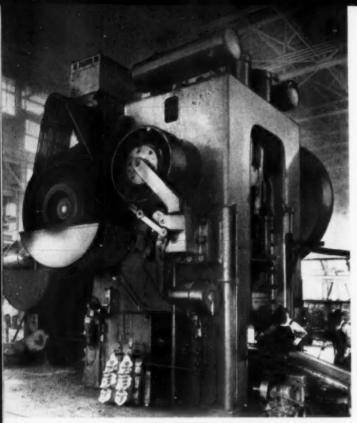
This 6000-Ton Mechanical Forging Press, Driven by a 400-Hp. Motor, Is Claimed to Be the Largest Ever Built for This Type of Work. Forged shafts may be seen in the lower foreground
